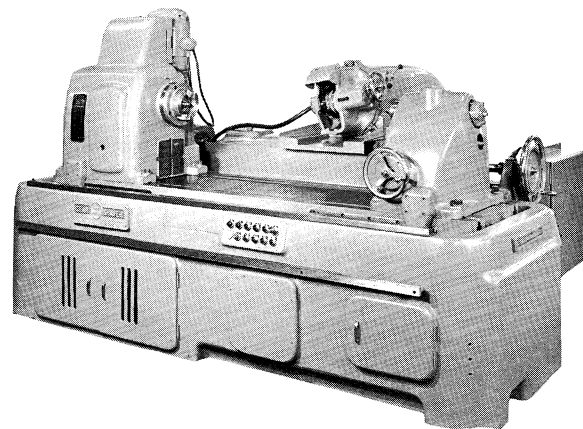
Model GCJ-36 in. shaver set up to shave external gears.
